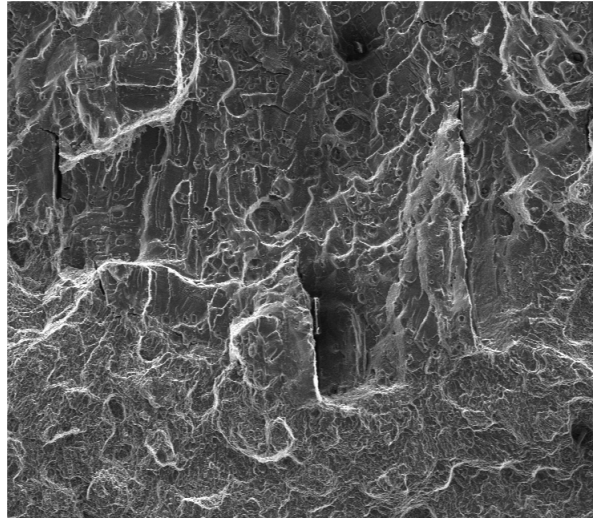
Striations at both sides of the weld line (weld bead and parent material).
